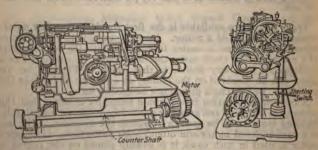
Back view showing counter-shaft at base. Fig. 127.—Countershaft geared to motor.
